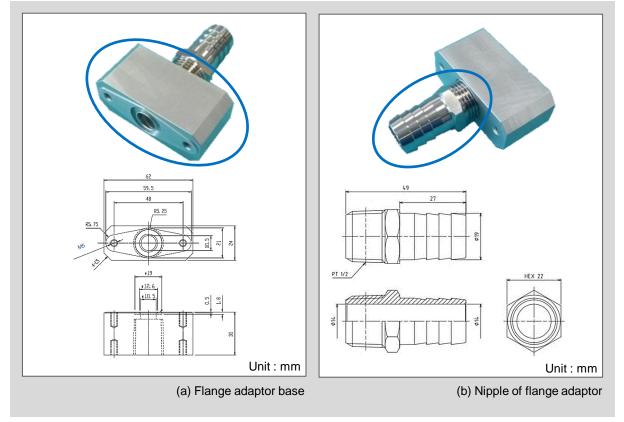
Flange adaptor kit : flange adaptor base and nipple
